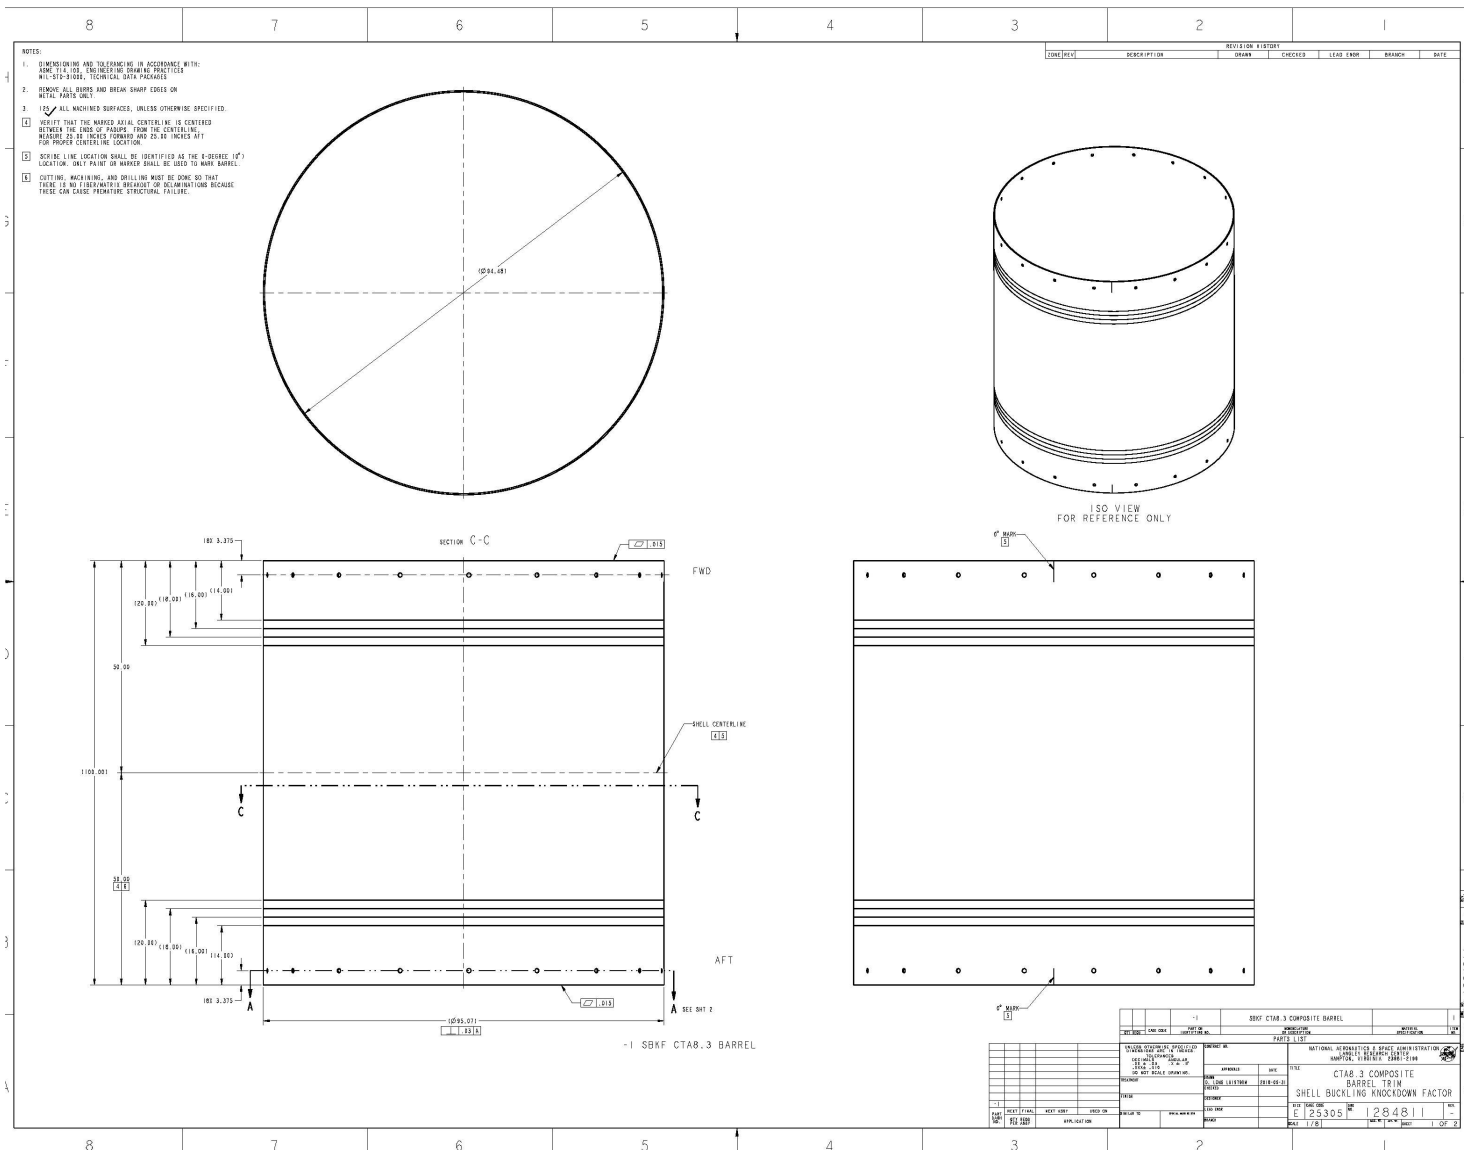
CTAB 3 trim, LaRC Drawing 1284811.
